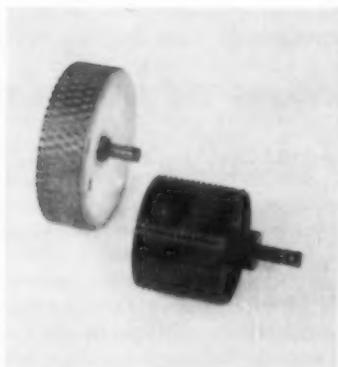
Left to right: the Supreme and Kut-All drum-type cutters for use in a drill press or power-operated hand drill.
